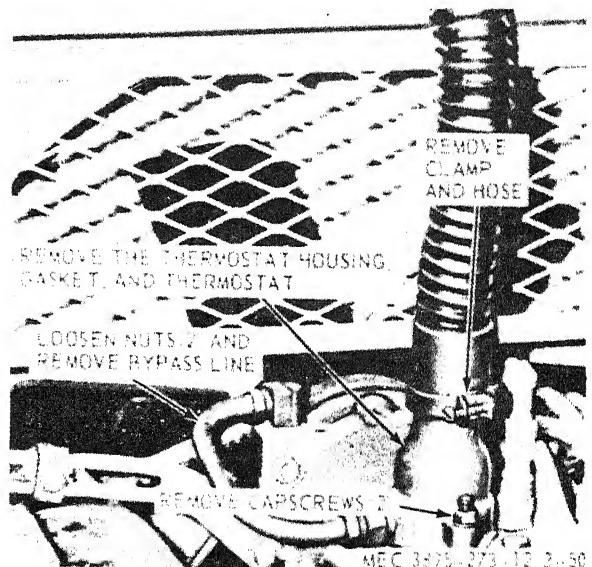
Thermostat and thermostat housing, removal and installation.
